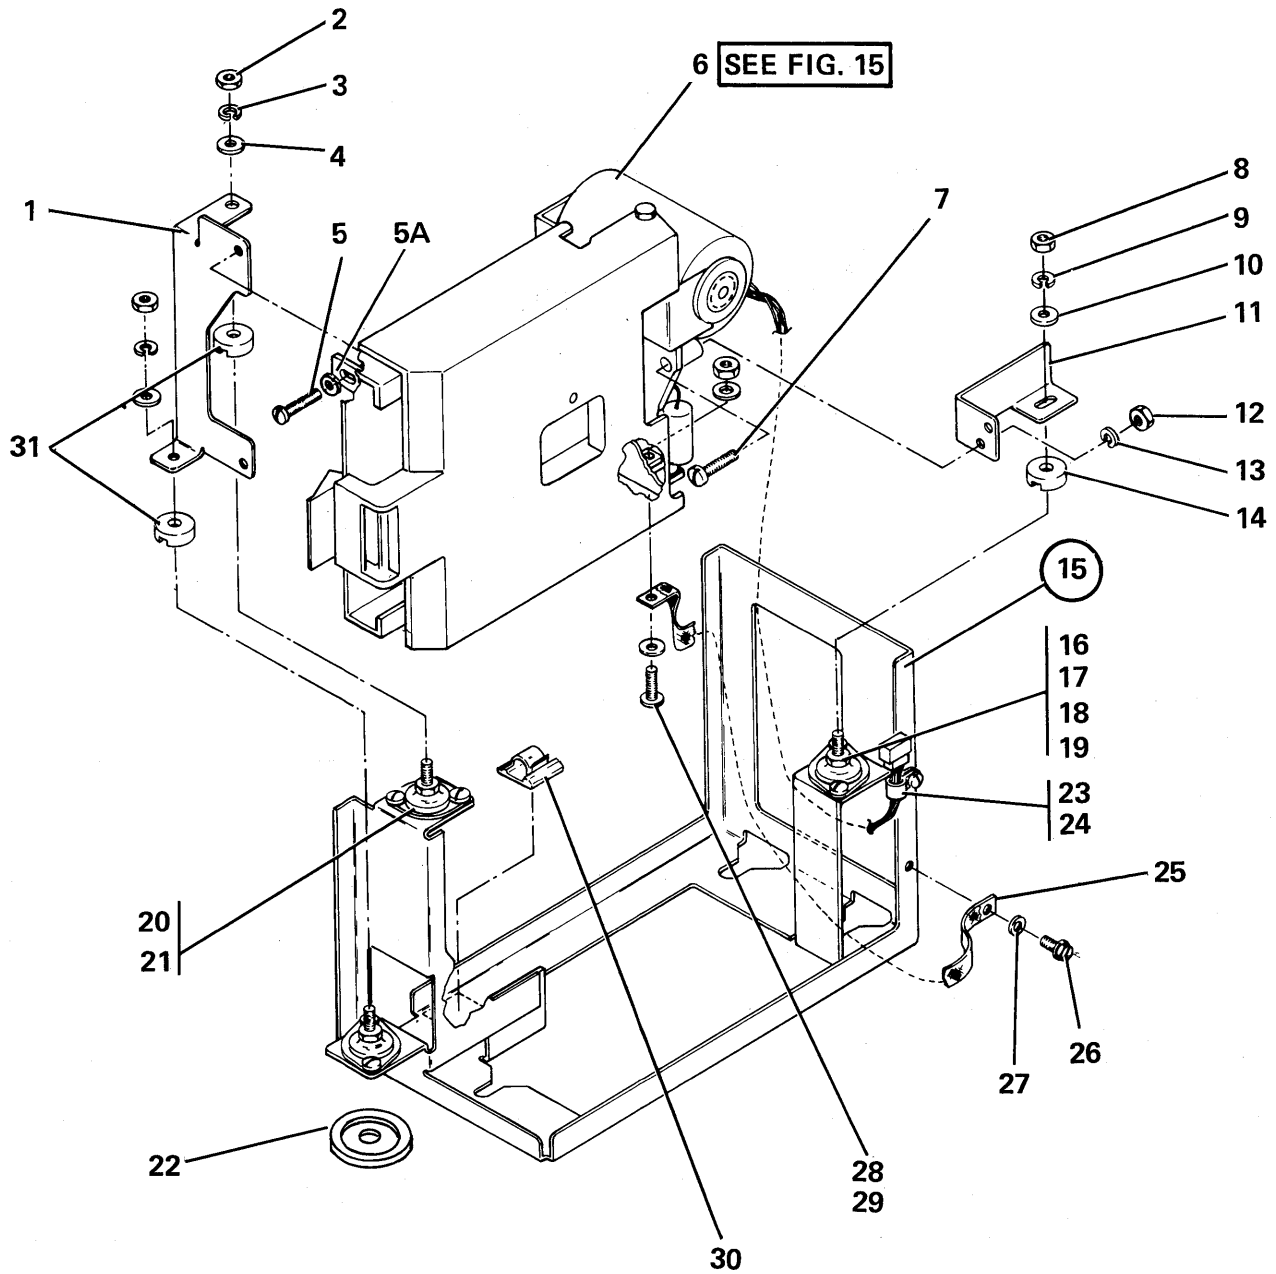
DISK DRIVE ASSEMBLY. SEE LIST 12.
